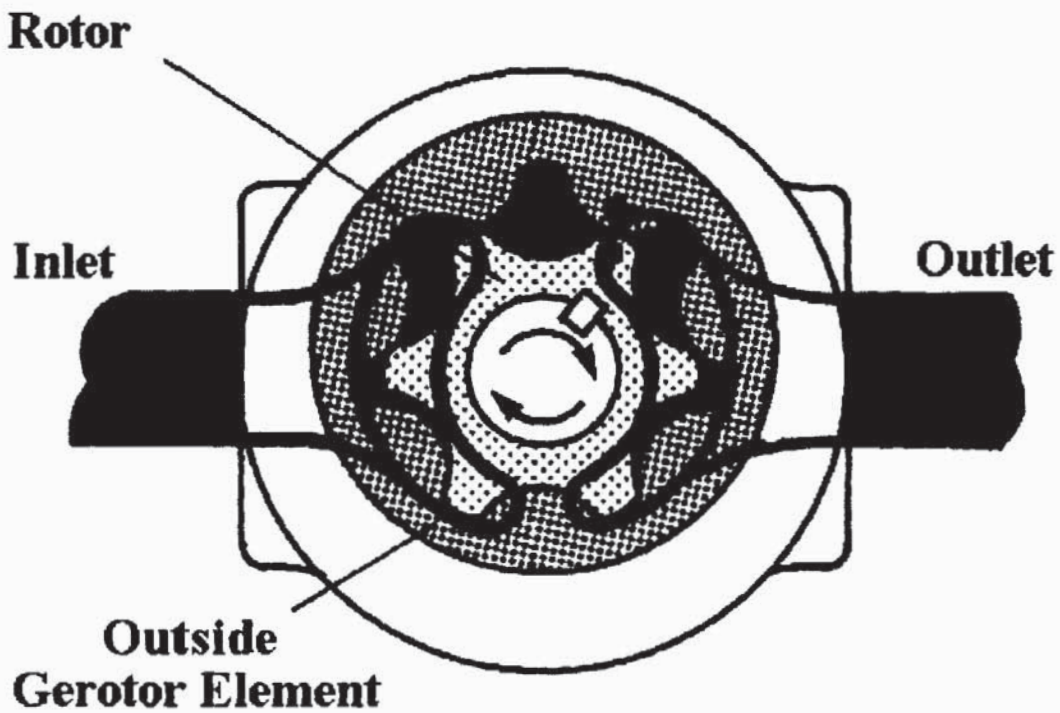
Illustration of an internal (gerotor) gear pump.
